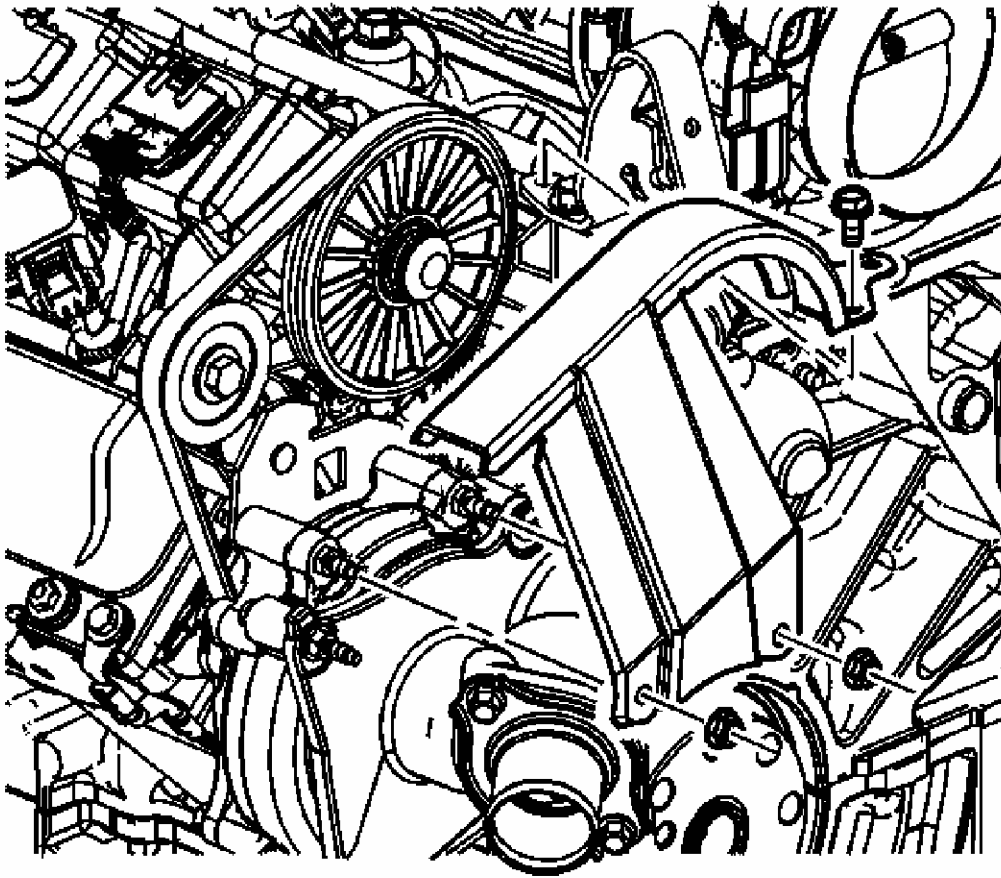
Identifying Water Pump Drive Belt Shield Bolt & Nuts
